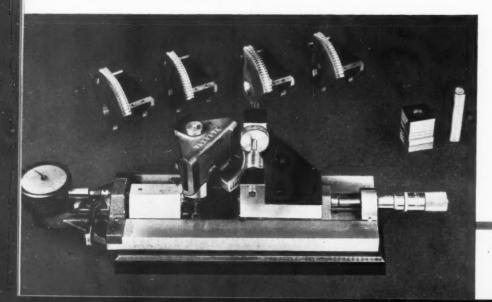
This gear-checking fixture is highly practical where product design is never actually "frozen."
